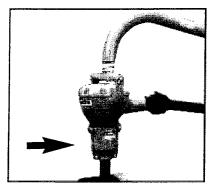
AUGER ADAPTER GUARD INSTALLED
